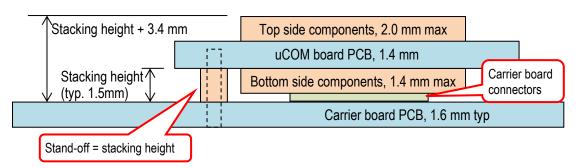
uCOM Board Mounting on Carrier Board, Stacking Height
